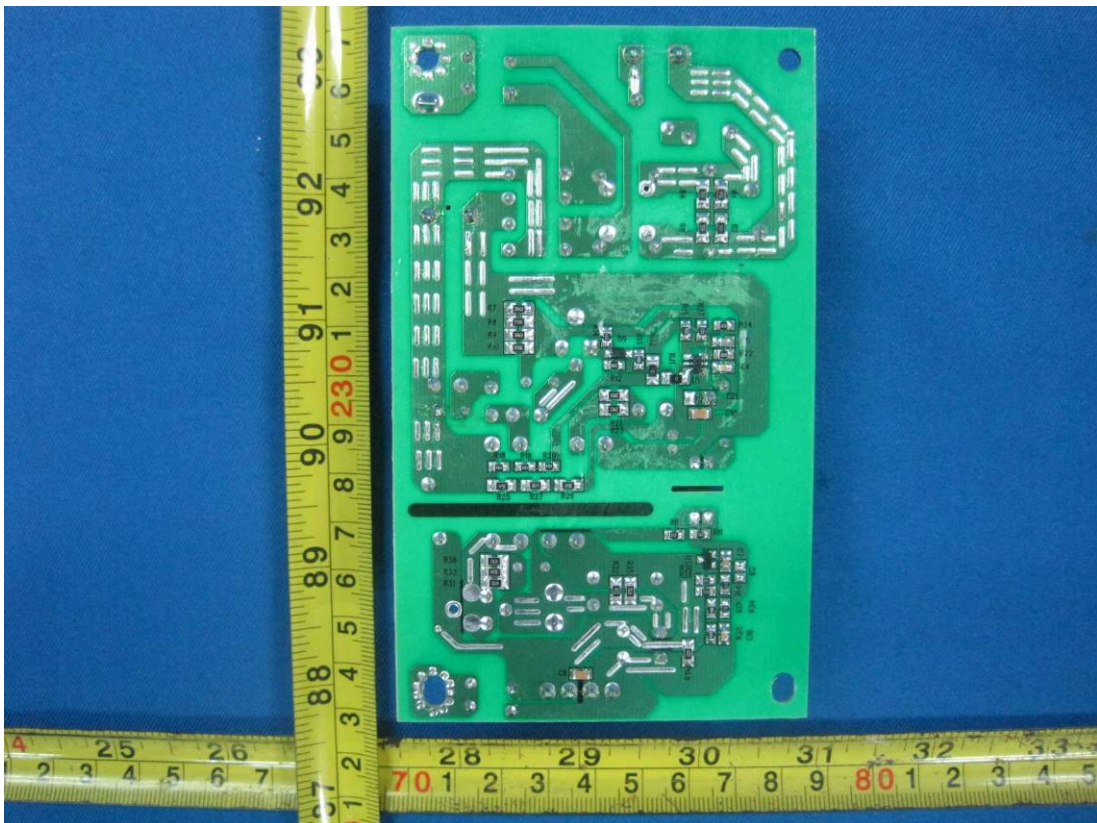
Bottom view of the power board (model: TPT18S12A)
